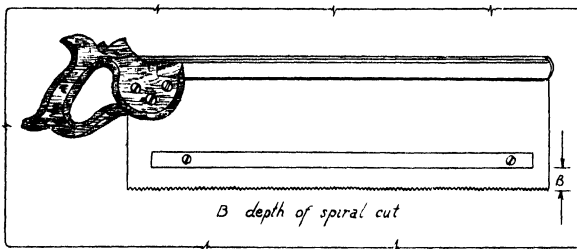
Showing gauge as used on saw to determine depth of cut in spiral cutting
